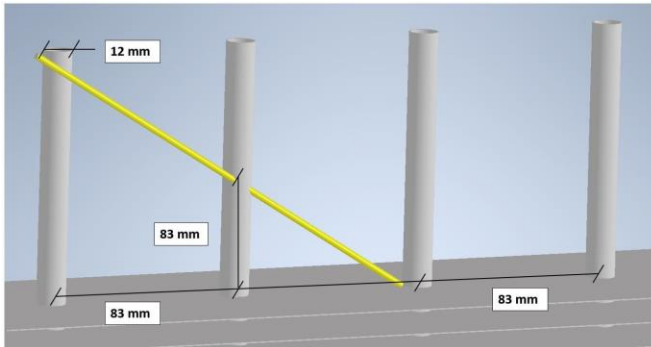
Drawing showing the geometrical conditions of brazing accessibility
